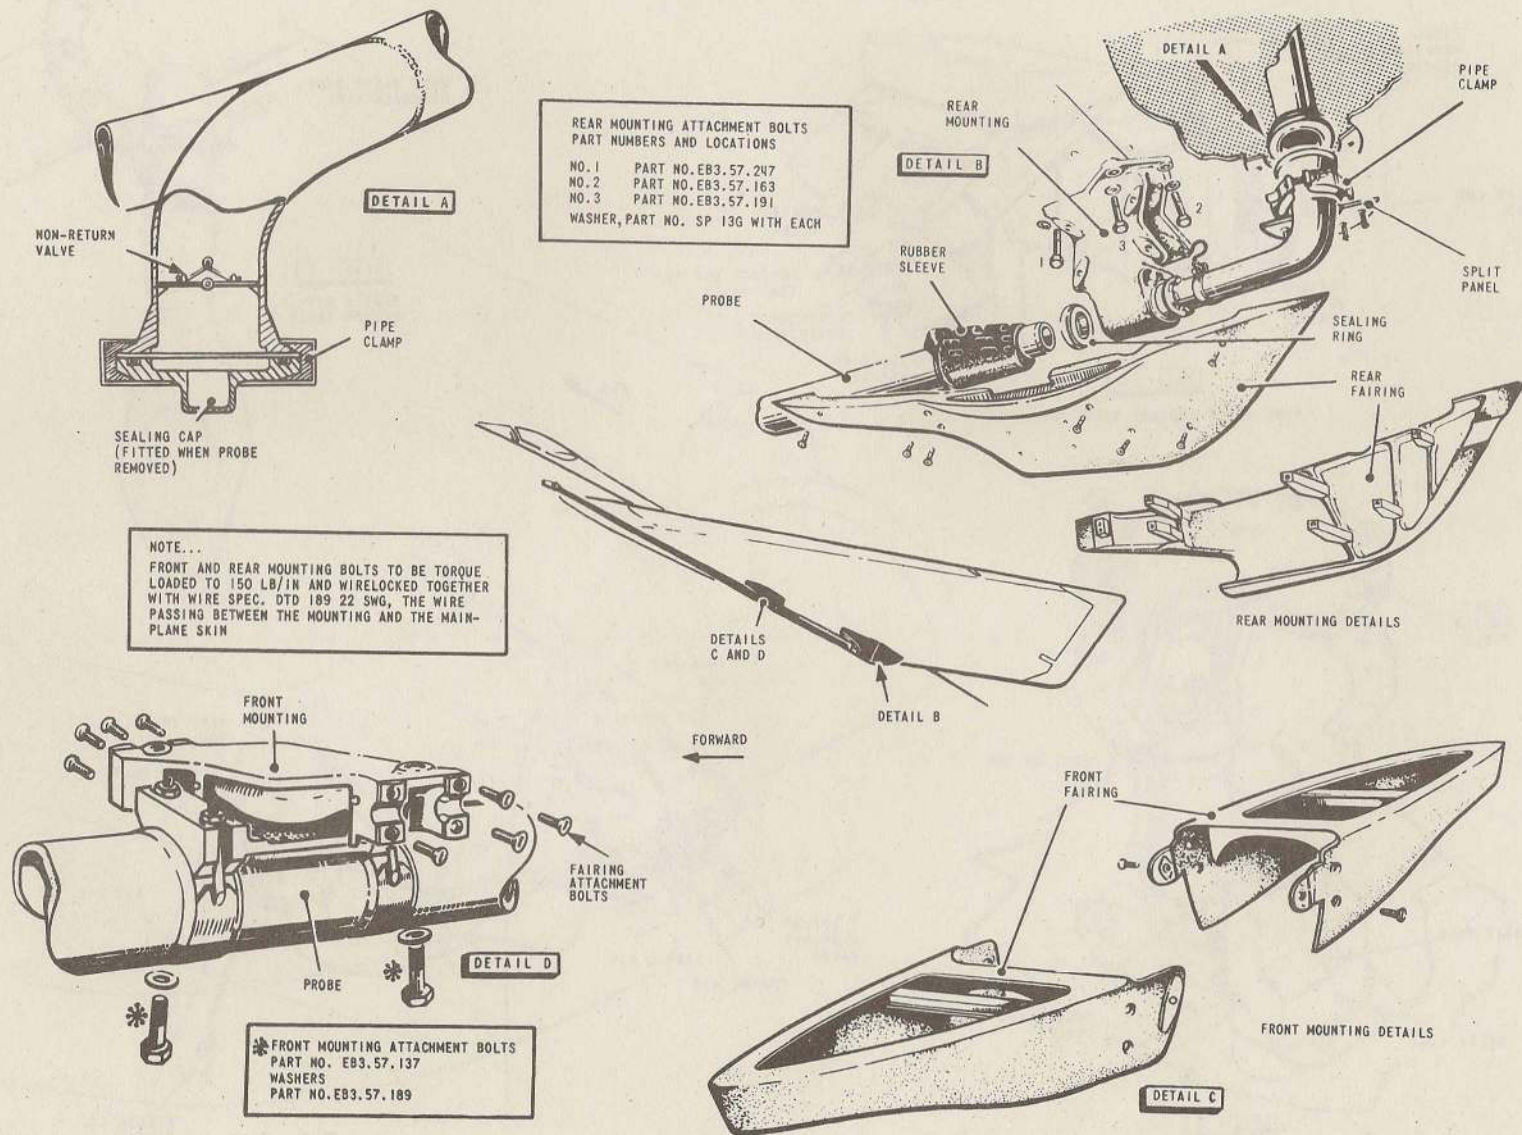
FLIGHT REFUELLING PROBE - REMOVAL AND ASSEMBLY
